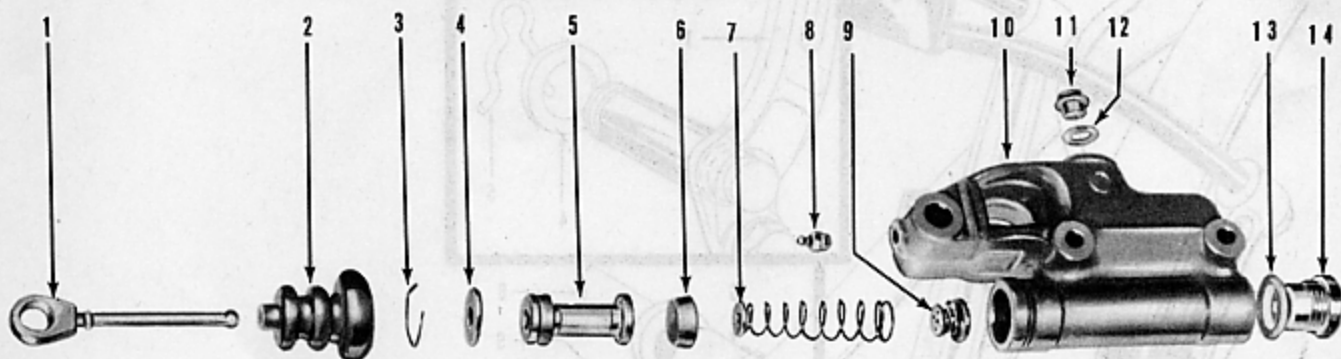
TYPICAL MASTER BRAKE CYLINDER - EXPLODED VIEW
